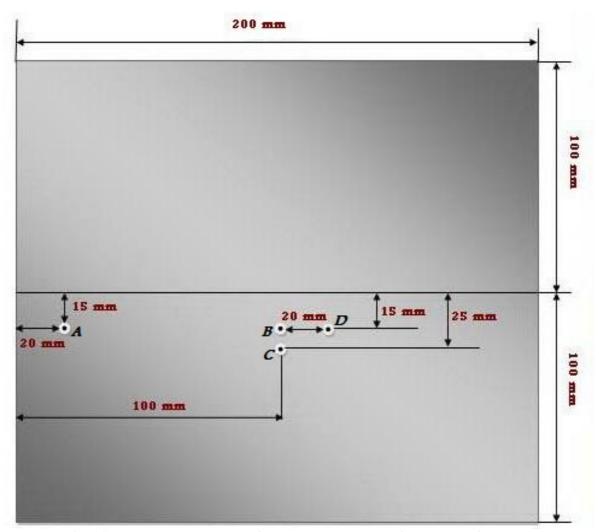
b :Thermocouples location embedded on aluminum workpiece.
